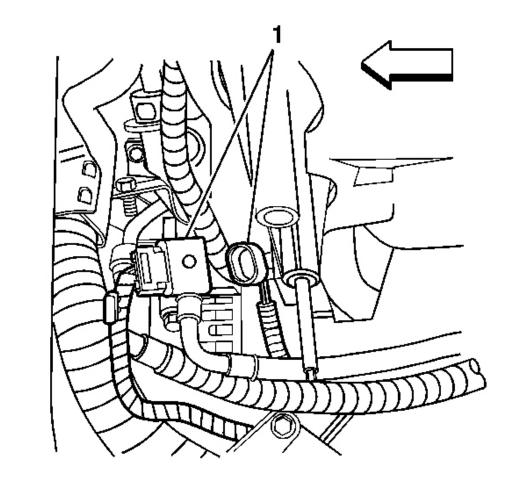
View Of Engine Coolant Temperature Electrical Connector Courtesy of GENERAL MOTORS CORP.
